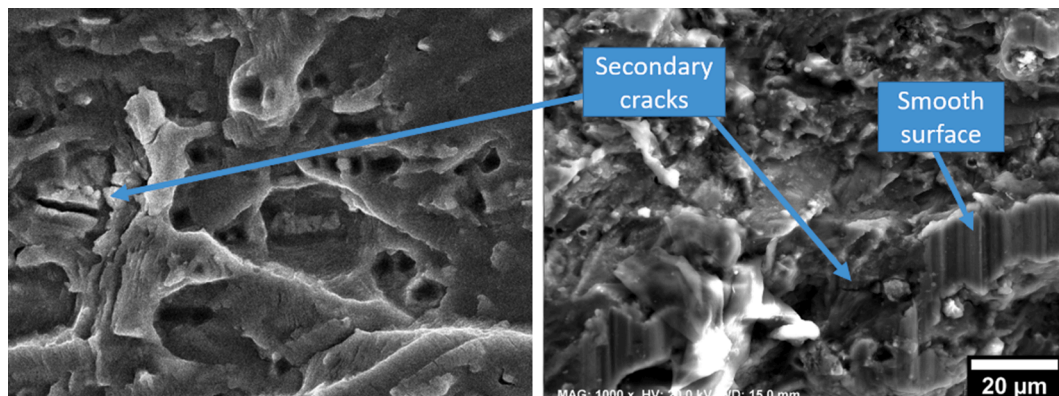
Evidences of the crack closure on the fracture surface.
